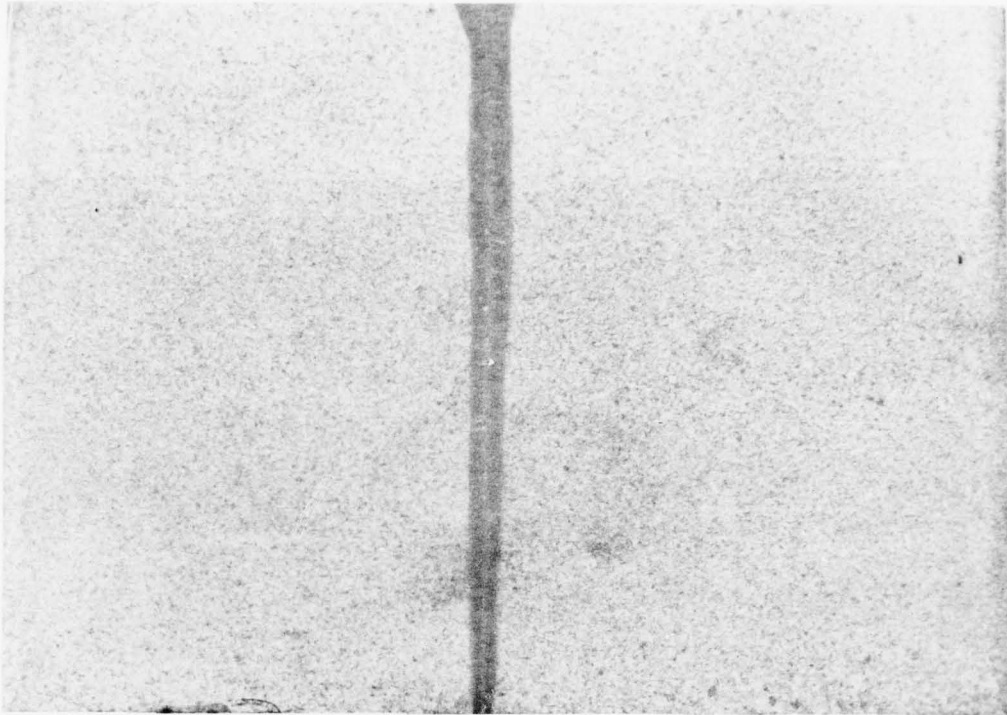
Electron-beam (EB) welds require exact fit-up and machine preparation of the weld joint, plus precise positioning of the electron beam.
